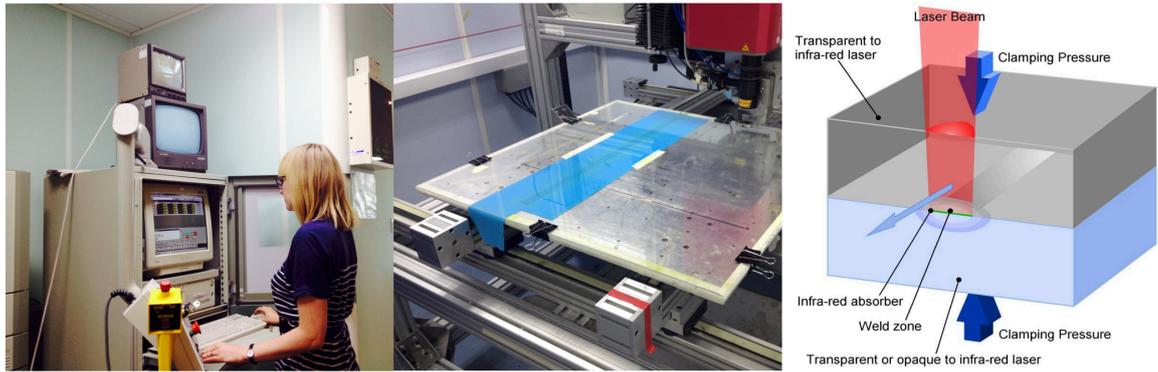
(Left) Researcher operating laser welding equipment from outside lab at TWI (TWI 2012)
